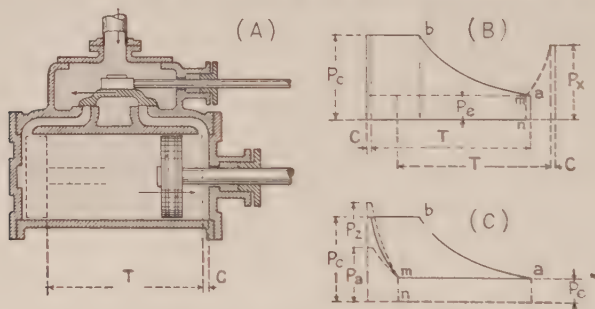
CUSHIONING SPACE AND RE-COMPRESSION IN CYLINDER OF STEAM OR AIR ENGINE
